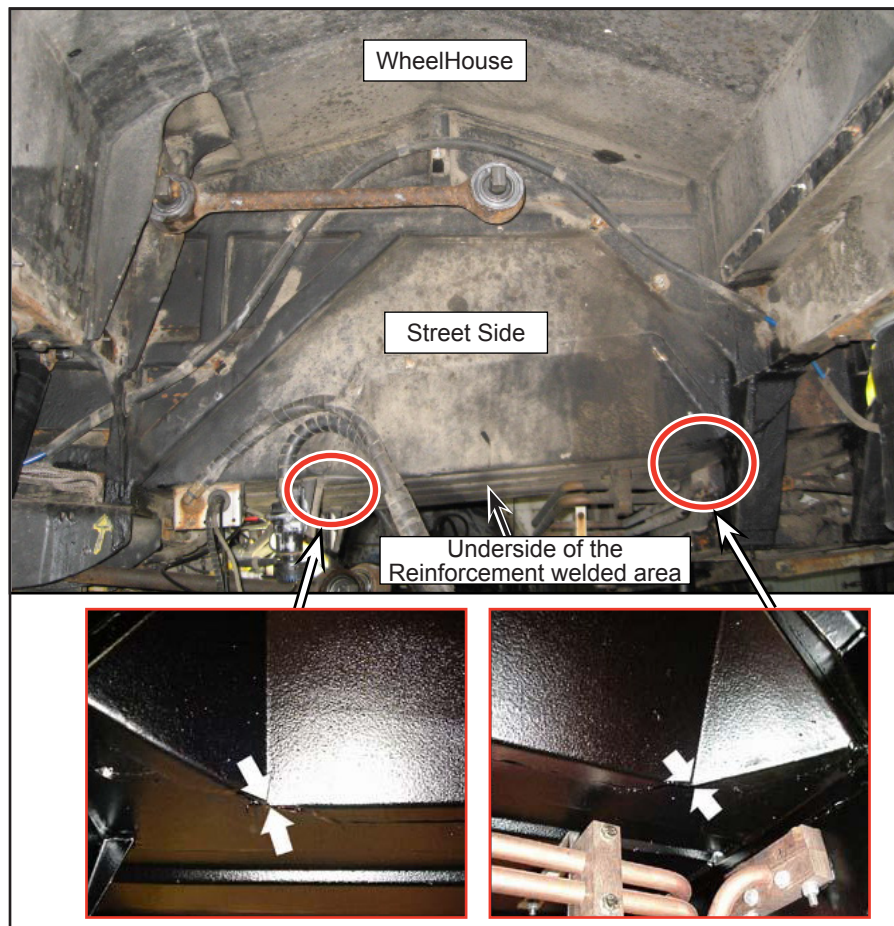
Inspection for Cracks Underneath the Street Side Wheelhouse
